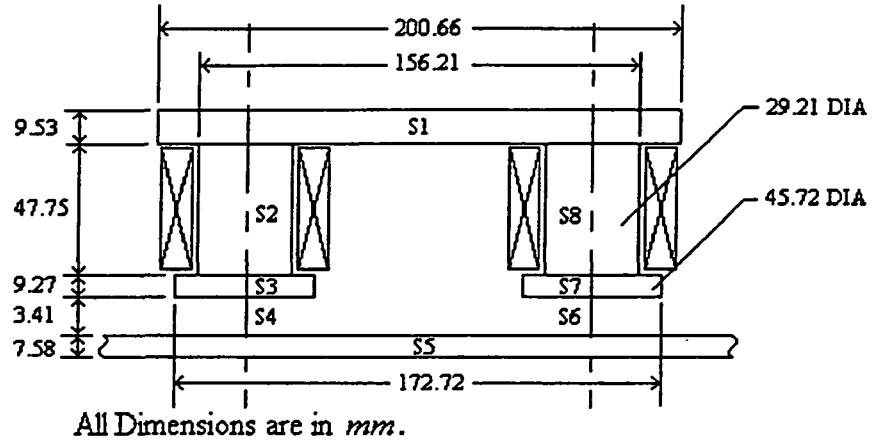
Magnetic circuit of a Magnetic Bearing Assembly.
